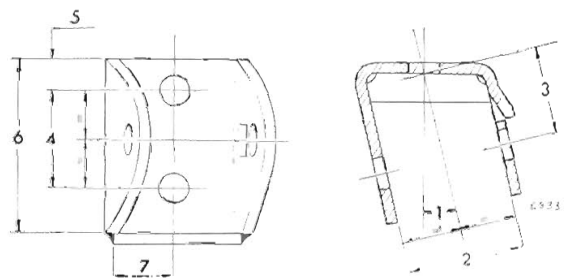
Herald 1200, 12/50 and Vitesse rear suspension radius rod
